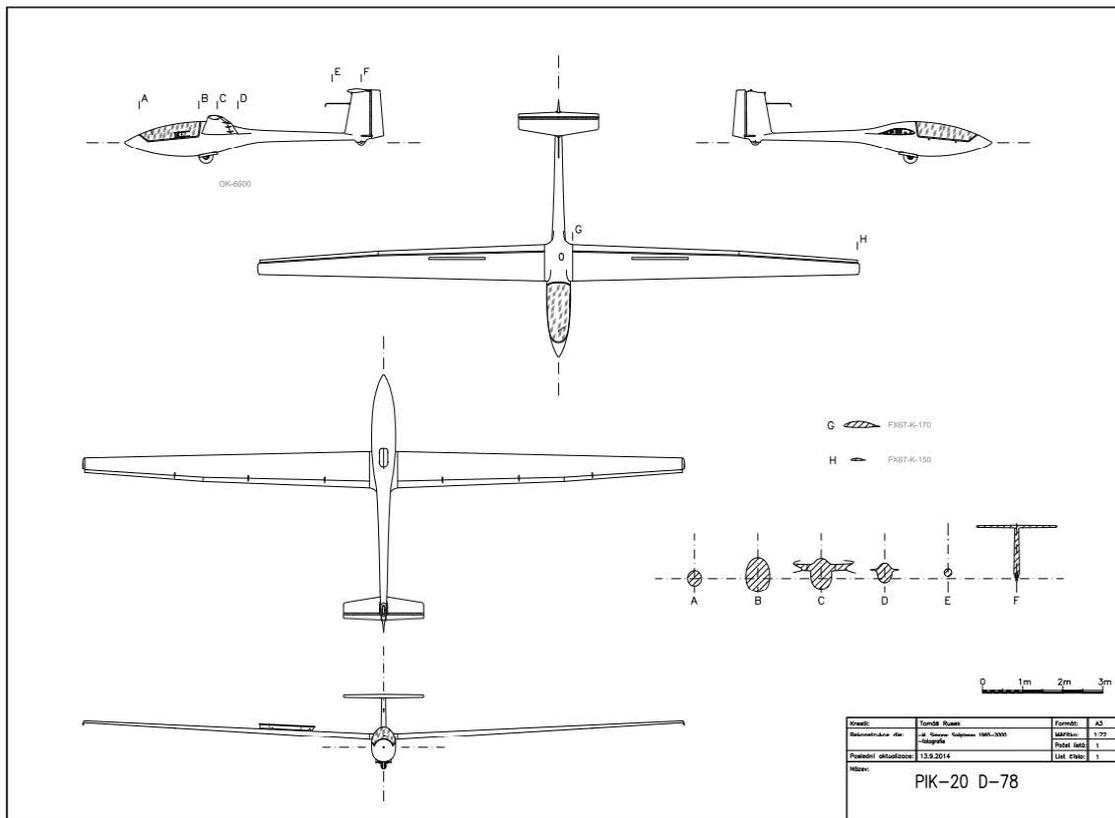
Scan of the technical drawing of the PIK-20D-78 glider
